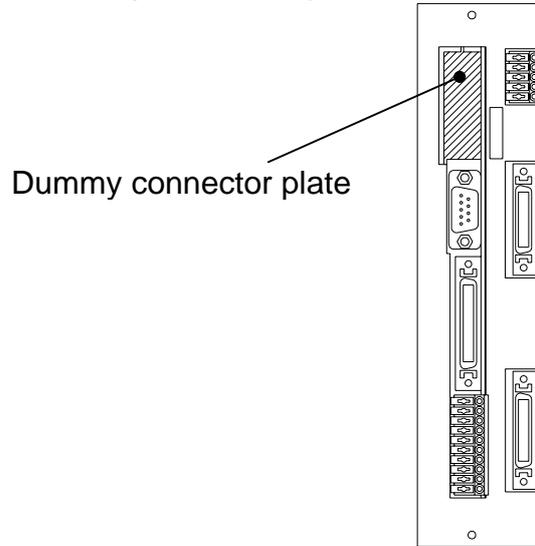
Rear Side of the TS3000/TS3100 Robot Controller
